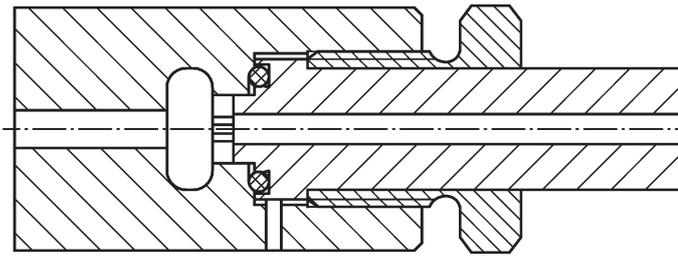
500 bar gas withdrawal connection — Assembly drawing
